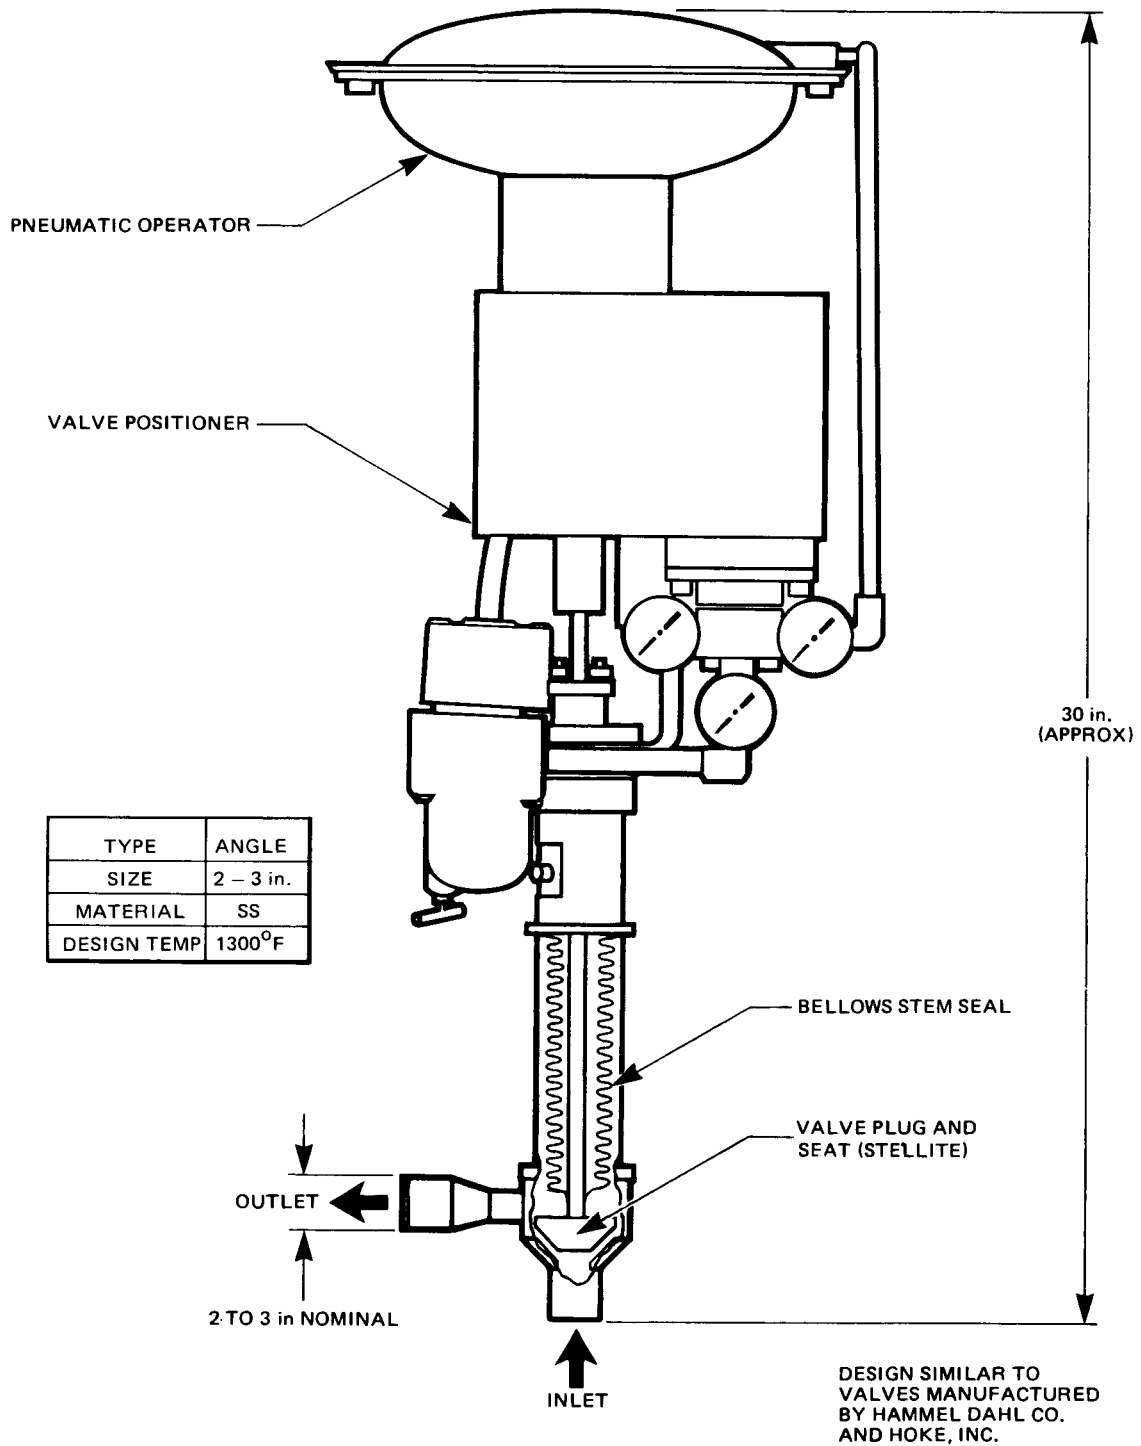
Two-to-Three-Inch Sodium Throttle Valve
